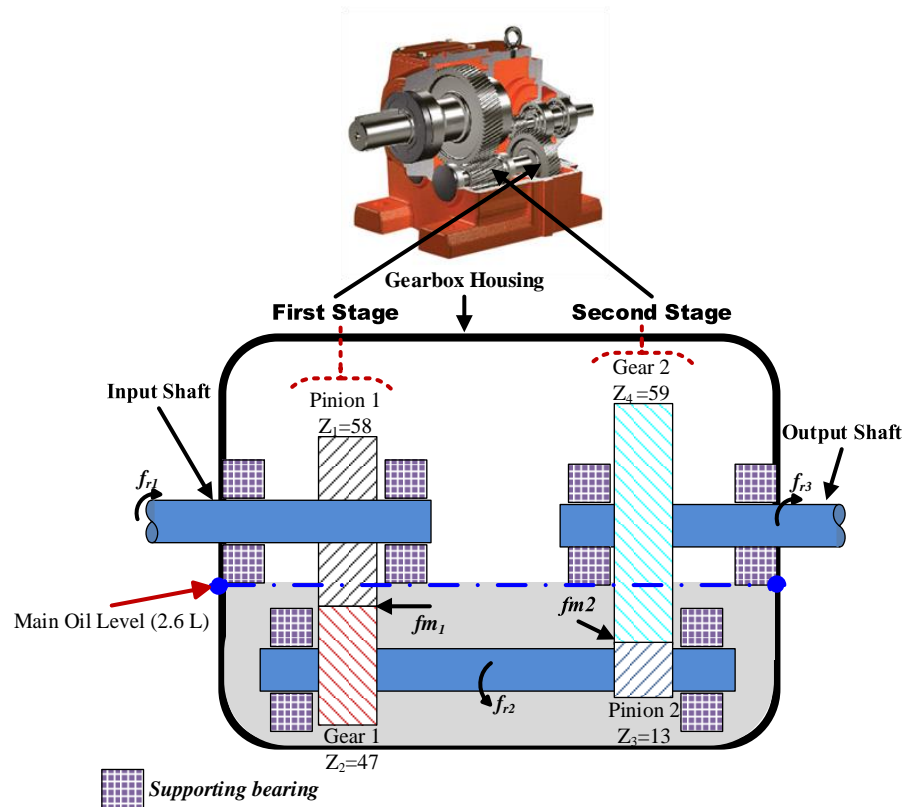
A photograph and schematic structure of two-stage helical gearbox
